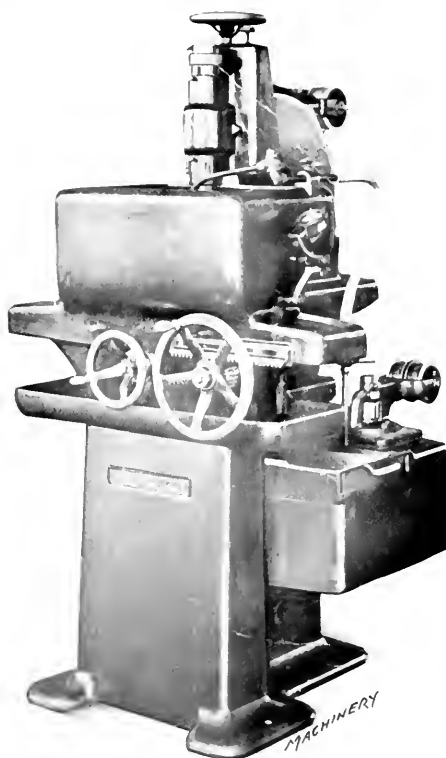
Union Twist Drill Co.'s No. 2 Formed Cutter Grinder
